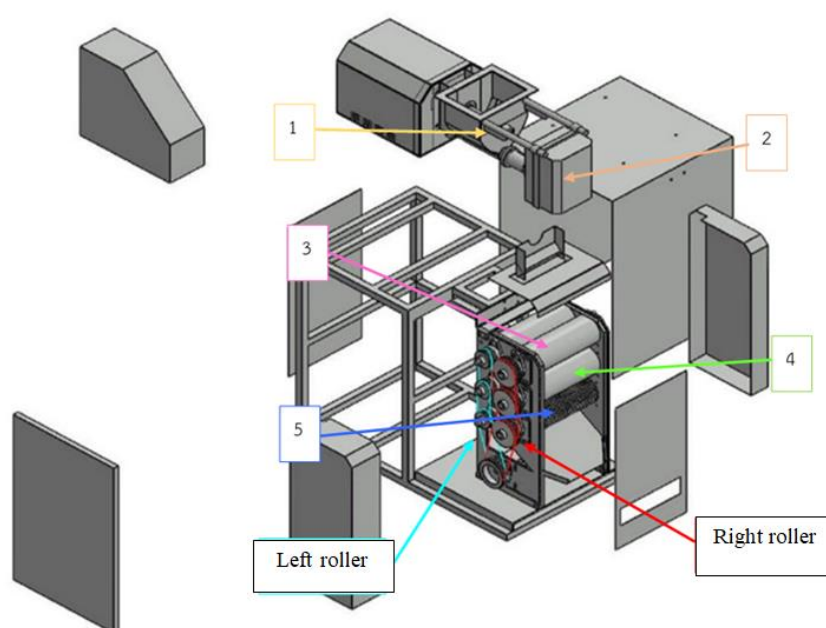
Schematic of rice forming machine consists of 1) screw conveyor motor 2) blade motor 3) upper roller 4) middle roller and 5) lower roller
